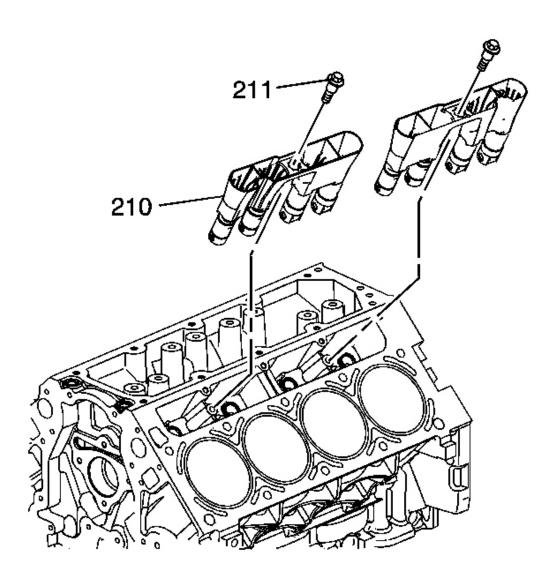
View Of Lifter Guides & Lifters Courtesy of GENERAL MOTORS CORP.
